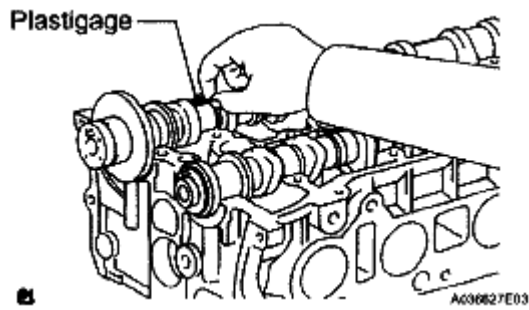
Laying Strip Of Plastigage Across Each Of Camshaft Journals
